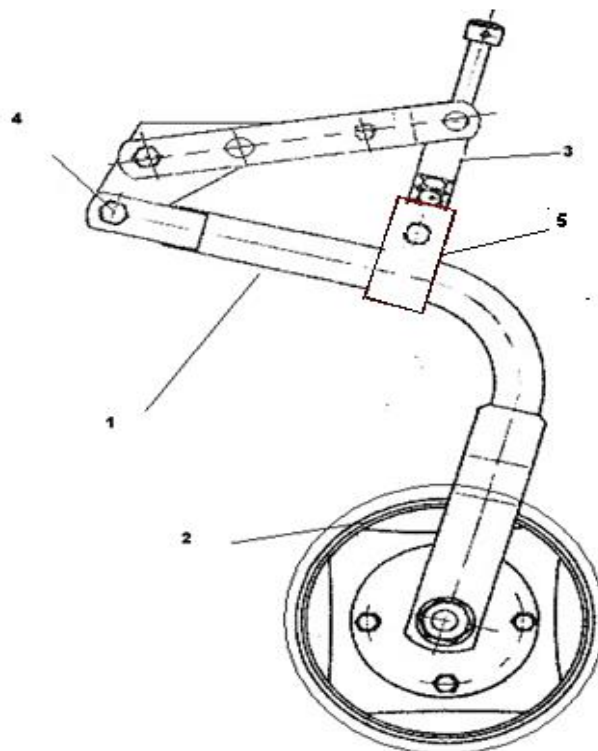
Ground copying wheel: 1-frame, 2-wheel with tire, 3-nut screw mechanism, 4 frame mounting system, 5-wheel changing wheel
